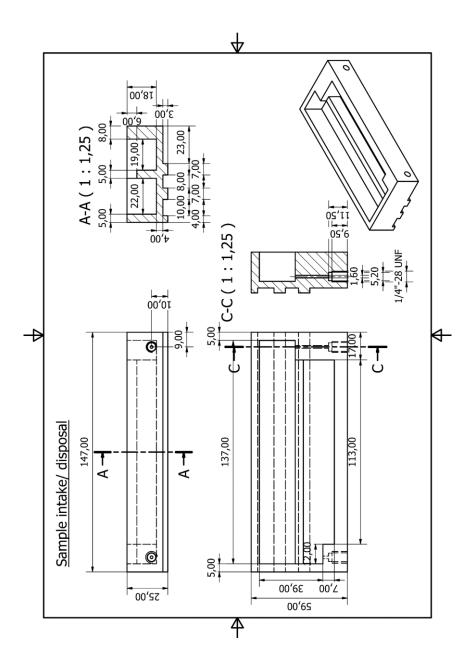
Fig D: Technical drawing of the sample intake and outflow. The sample intake and outflow was custom-made from bulk PTFE material. All dimensions are provided in mm.
